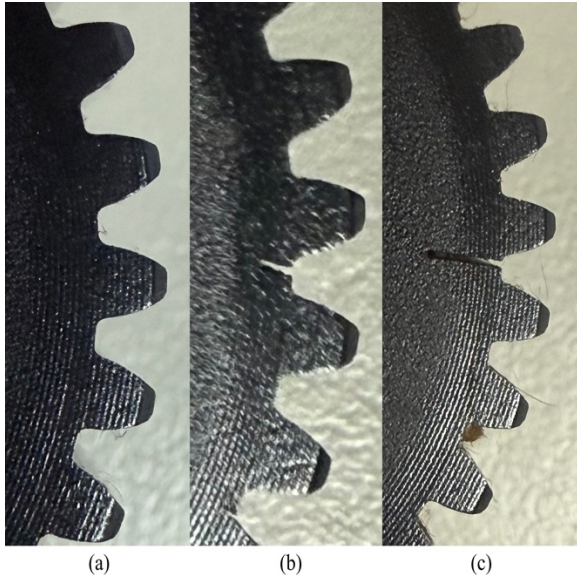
Spur gear tooth crack (a) Normal gear (b) 1mm tooth crack gear (c) 3mm tooth crack gear
